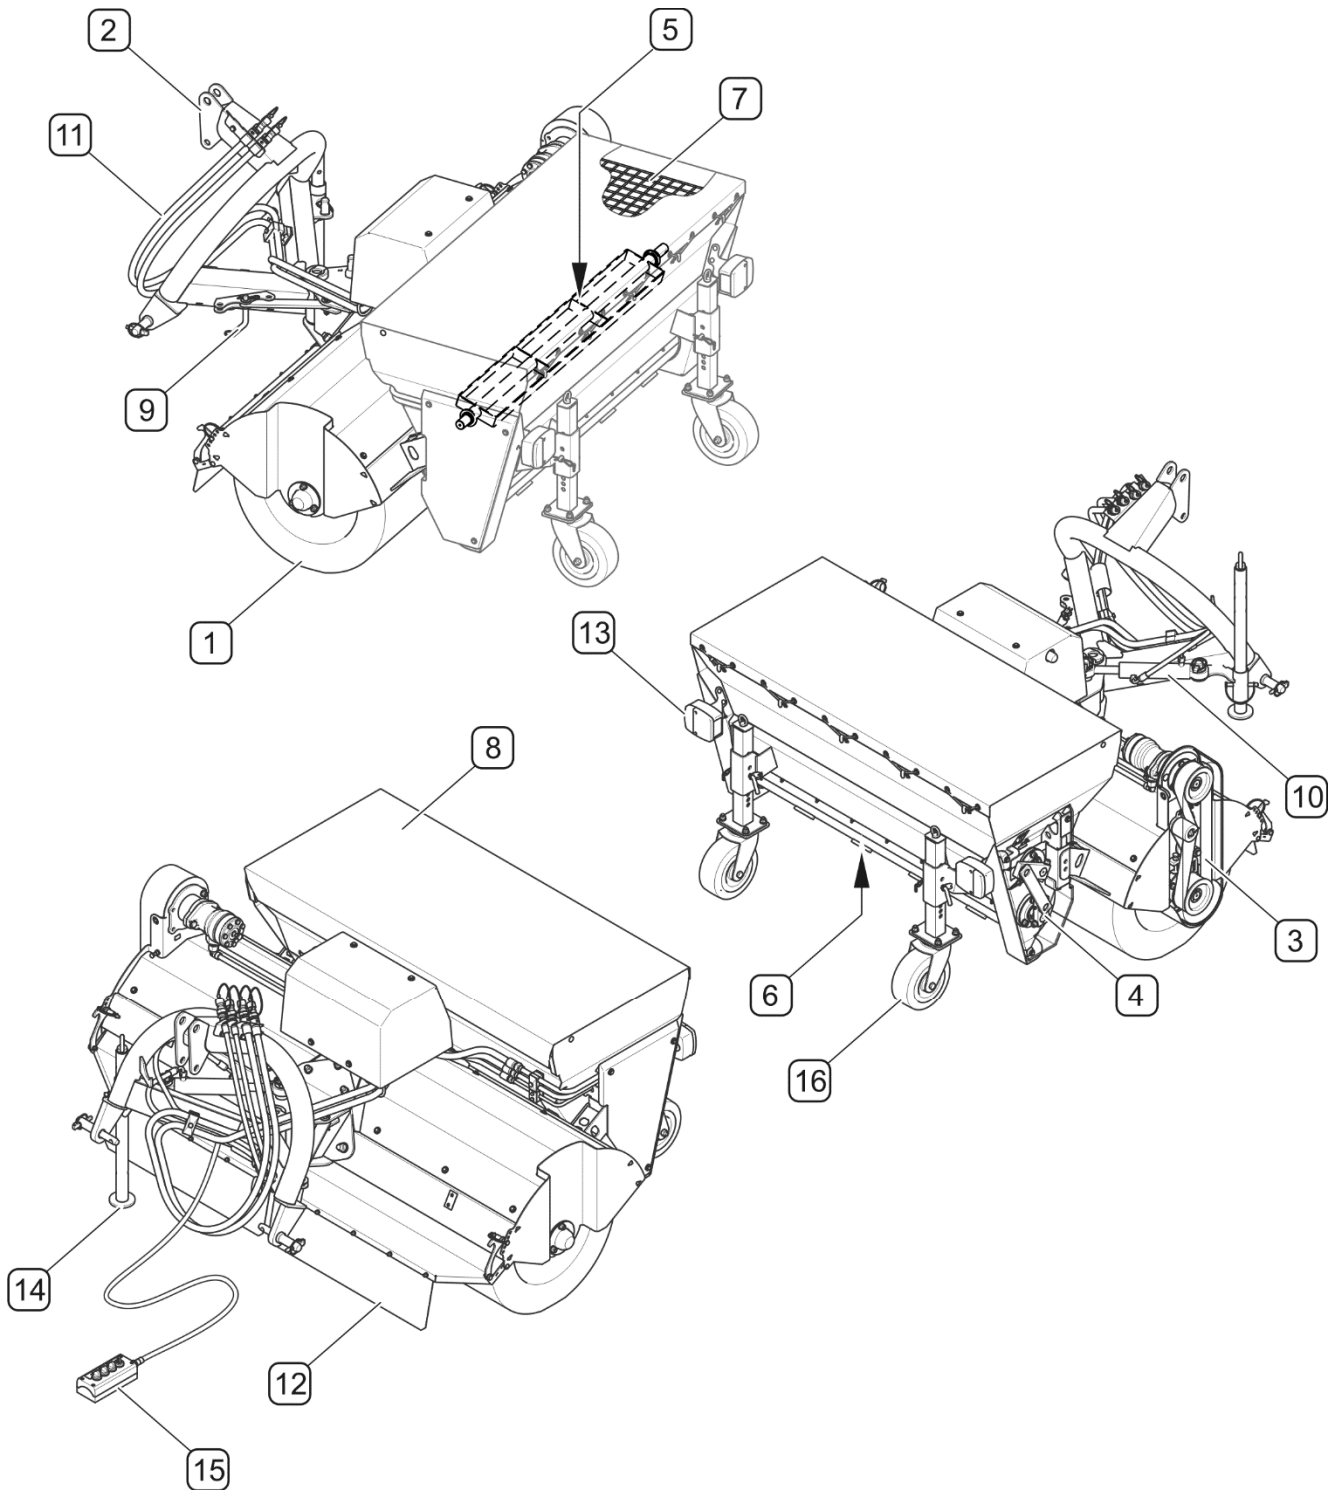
General design of sweeper (hydraulic drive)
